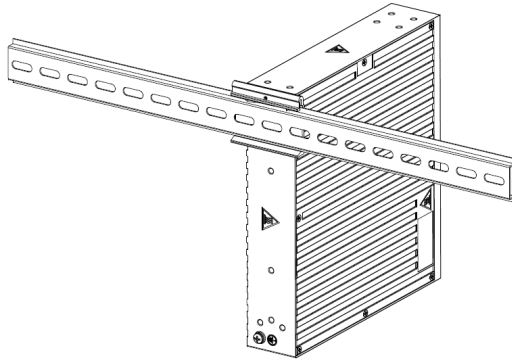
DIN Rail Mounting Option 1: Secure the Port Extender
